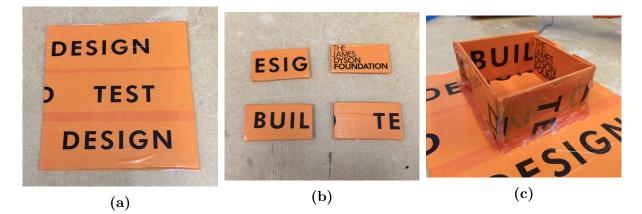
The production of a cardboard mold. (a) A cardboard base for the mold, covered in packing tape. (b) The walls for a simple rectangular mold, covered in tape to seal them off. (c) The assembled rectangular cardboard mold.
